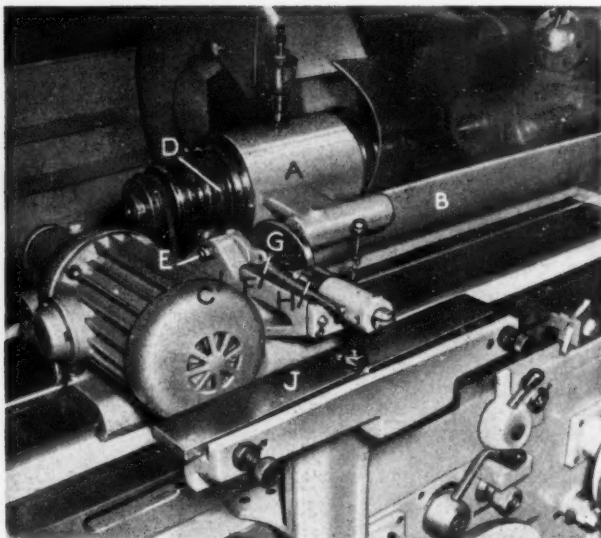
Close-up view of the workhead on the Zocca piston grinder, with cover removed to show the mechanism for producing the required ovality
